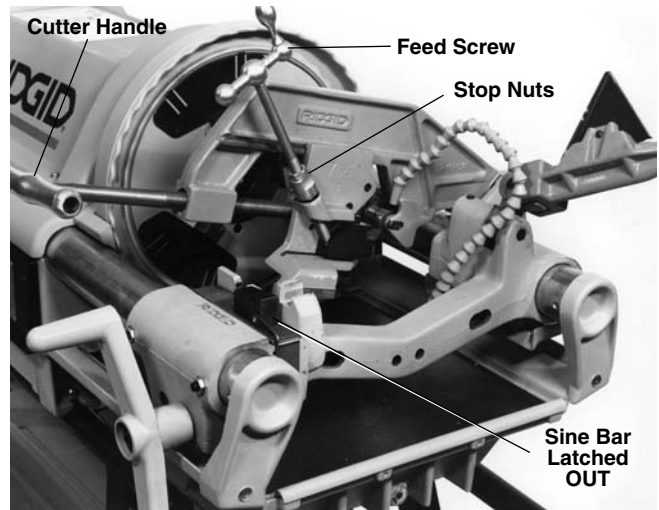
No. 766 Saran Cutter Installed. (Shown with Die Head Removed for Illustration Only.) Die Head MUST be Installed and in UP Position During Use of 766 Cutter
